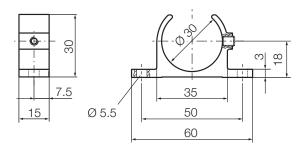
Mounting bracket BTL6-A-MF01-A-50
